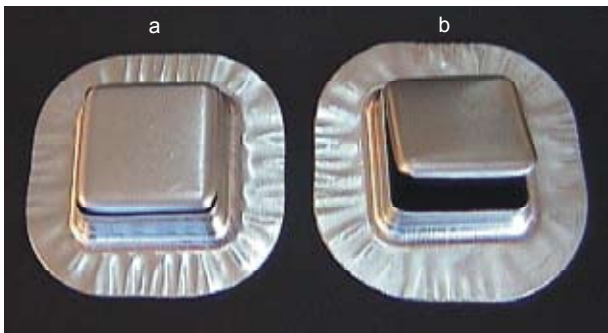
Fracture types obtained from experiments: a) with normal blank holder, blank diameter of 114 mm, b) with multi-point blank holder, blank diameter of 117 mm
